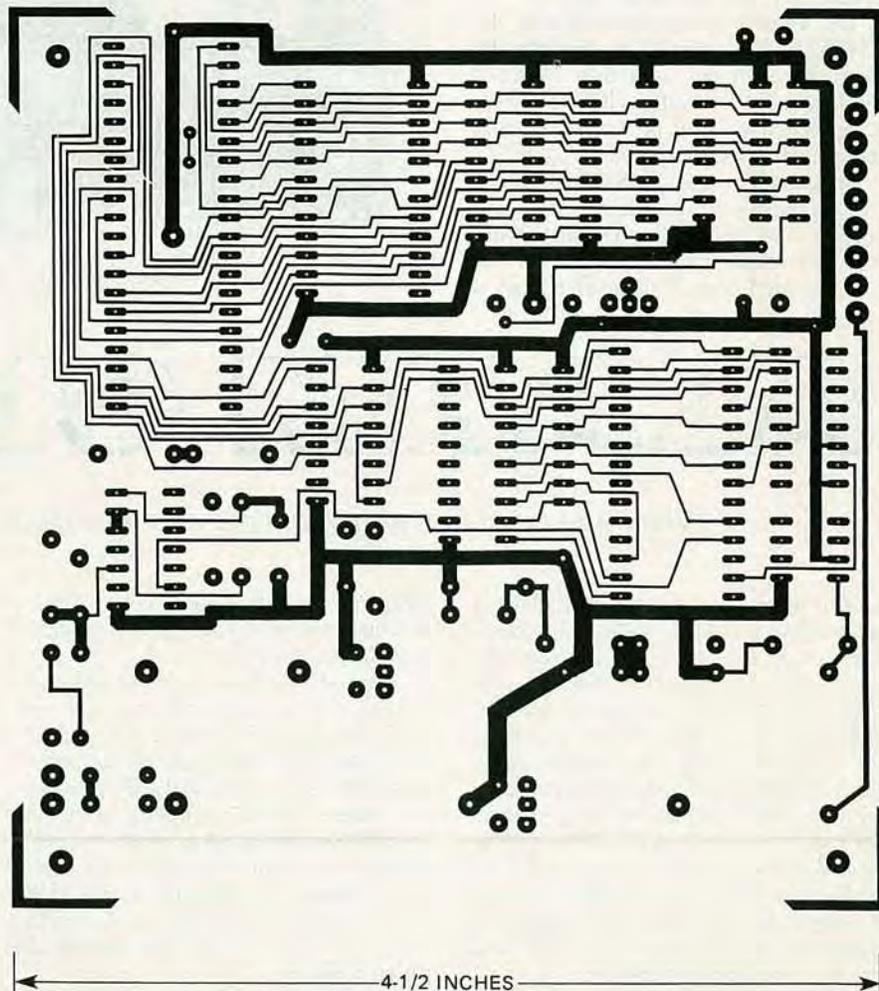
COMPONENT SIDE of clock board. Large pads at right are for connections to switches and speakers.
